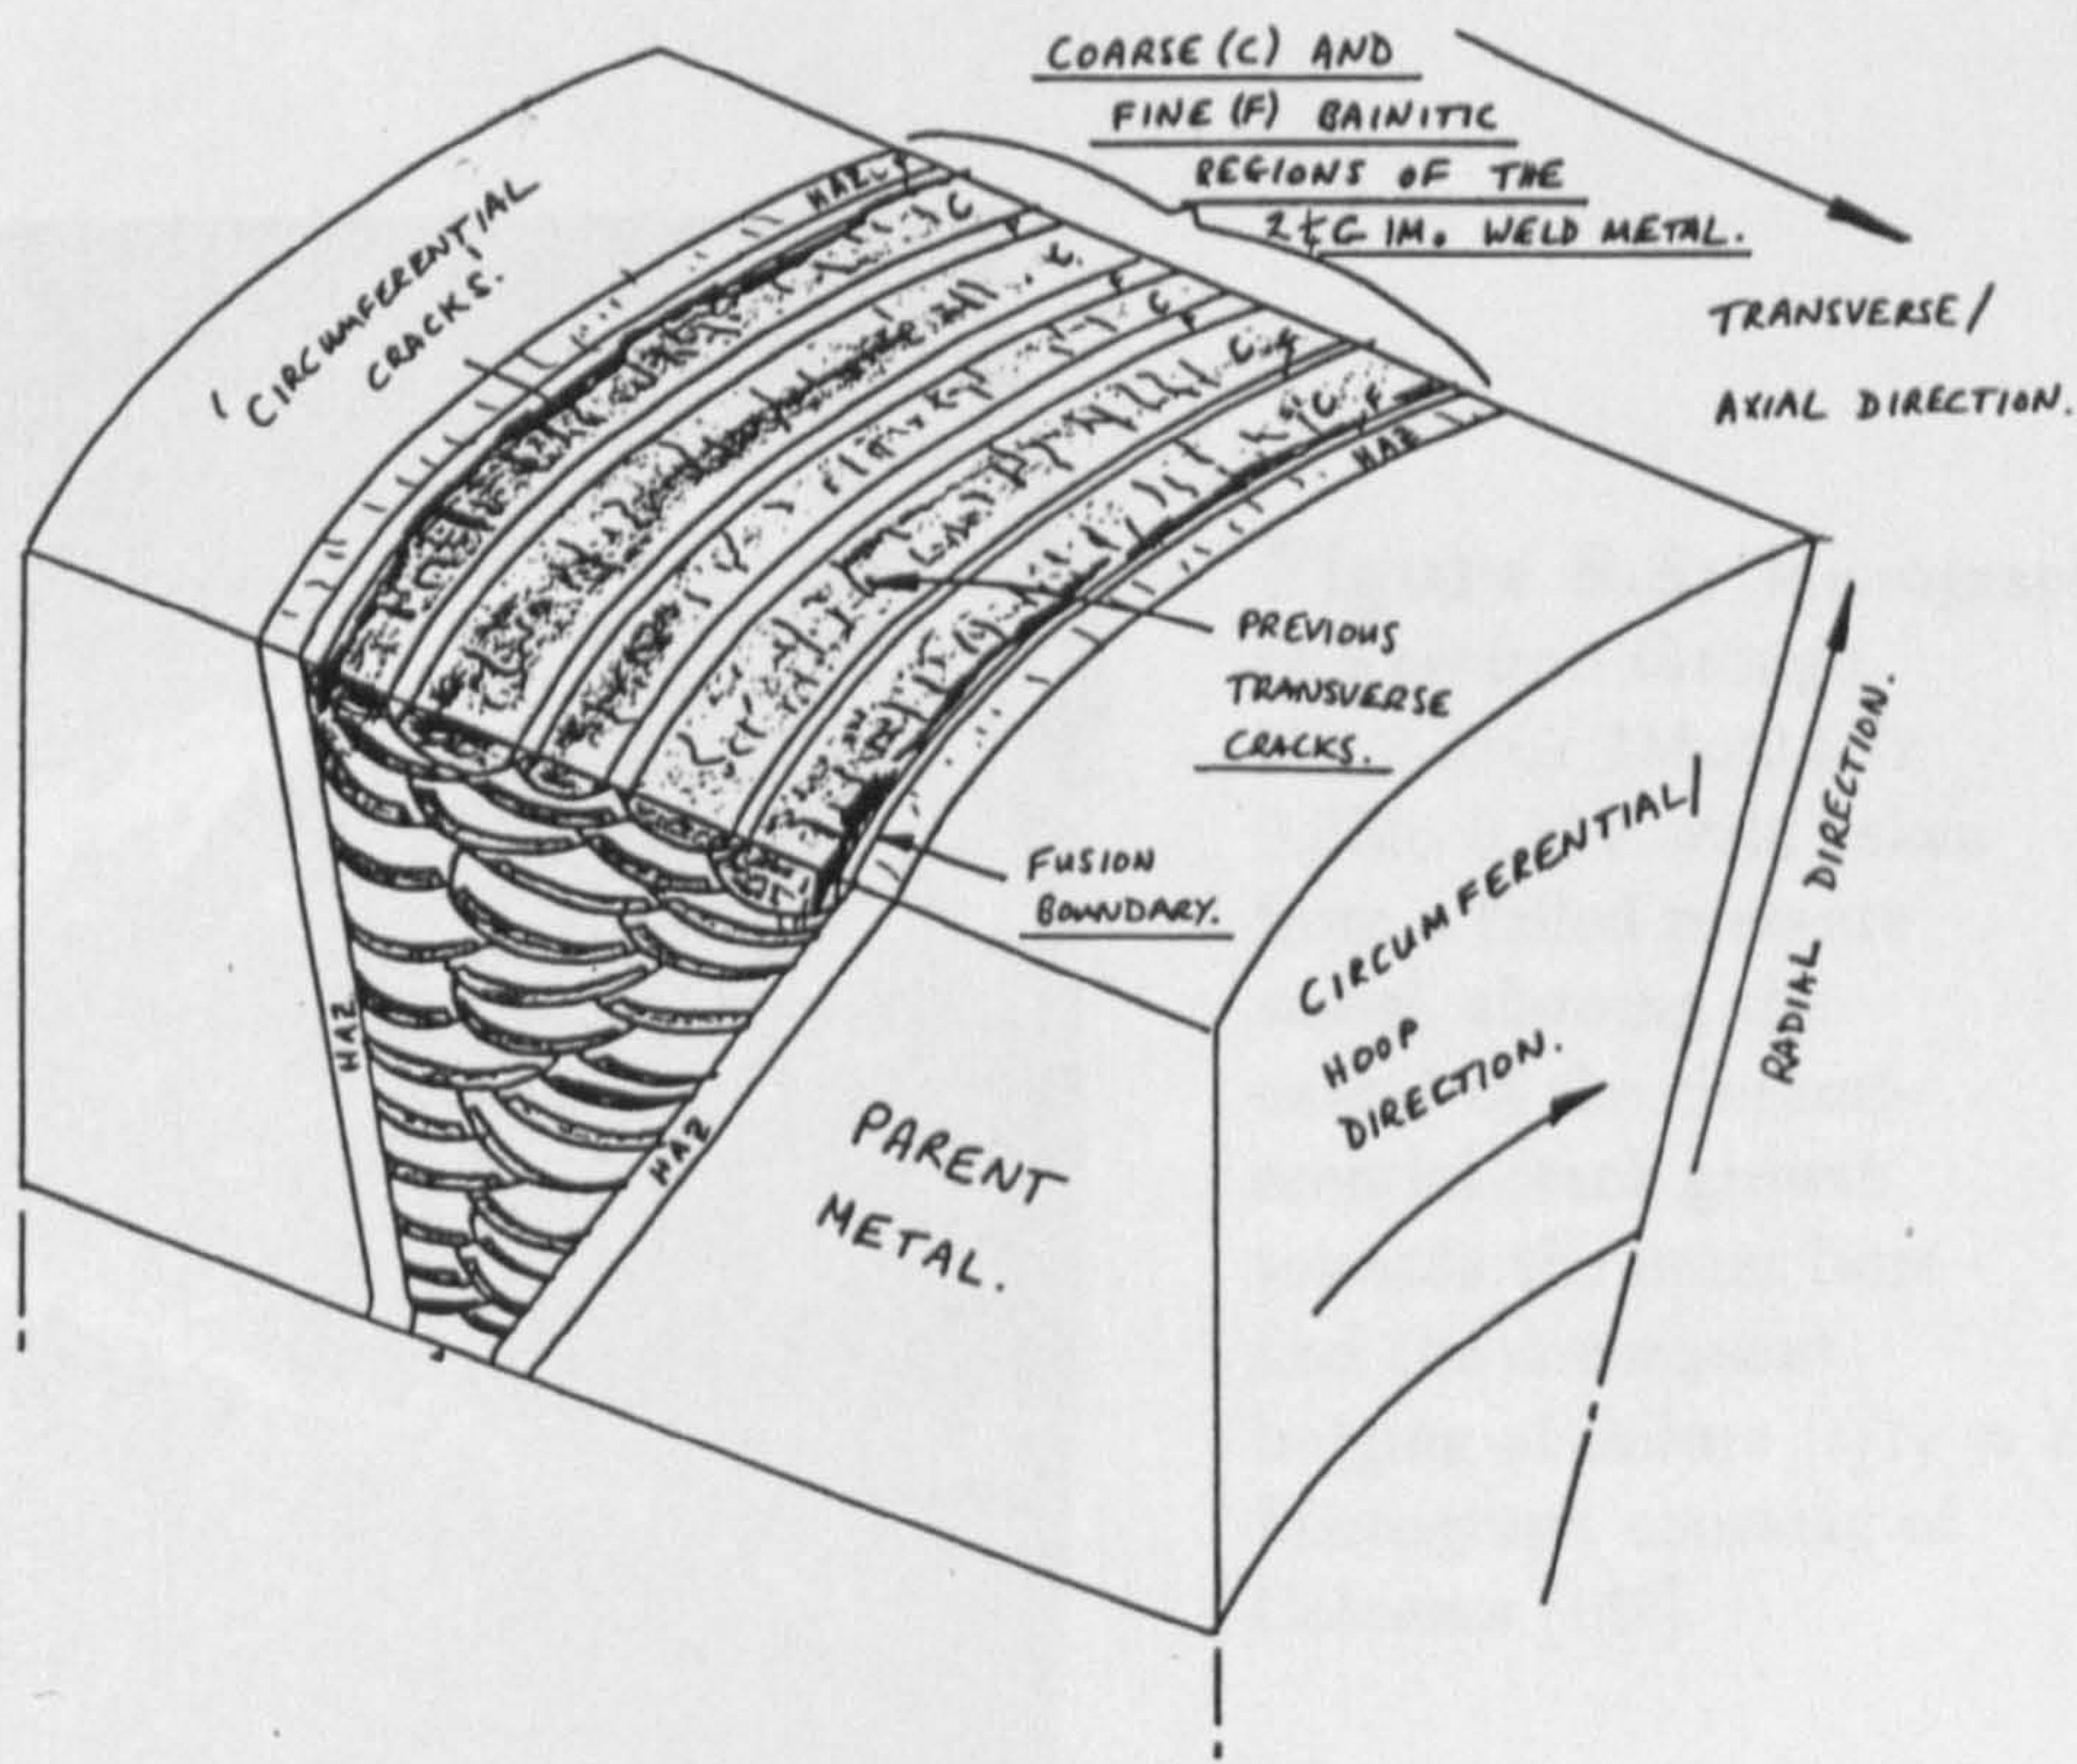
Sketch of a section taken from the 2.25Cr 1Mo:0.5Cr 0.5Mo 0.25V steam pipe weldment, showing the initial circumferential cracking in the coarse grained bainitic regions of the weld metal close to the fusion boundary. ($t/t_f \approx 76\%$).
